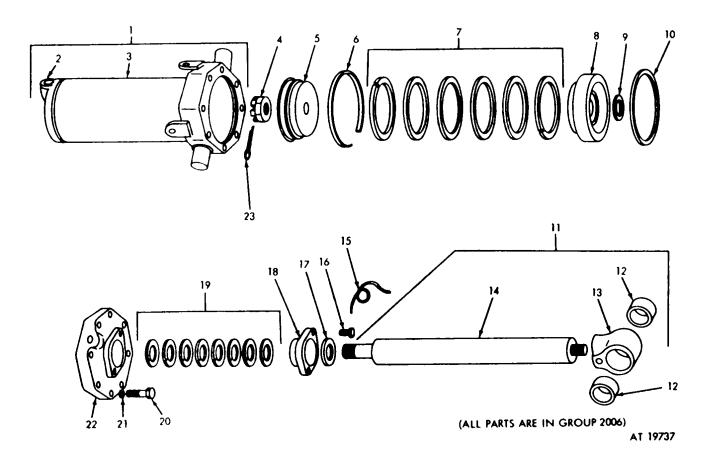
Hydraulic cylinder and ram assembly -- exploded view.
